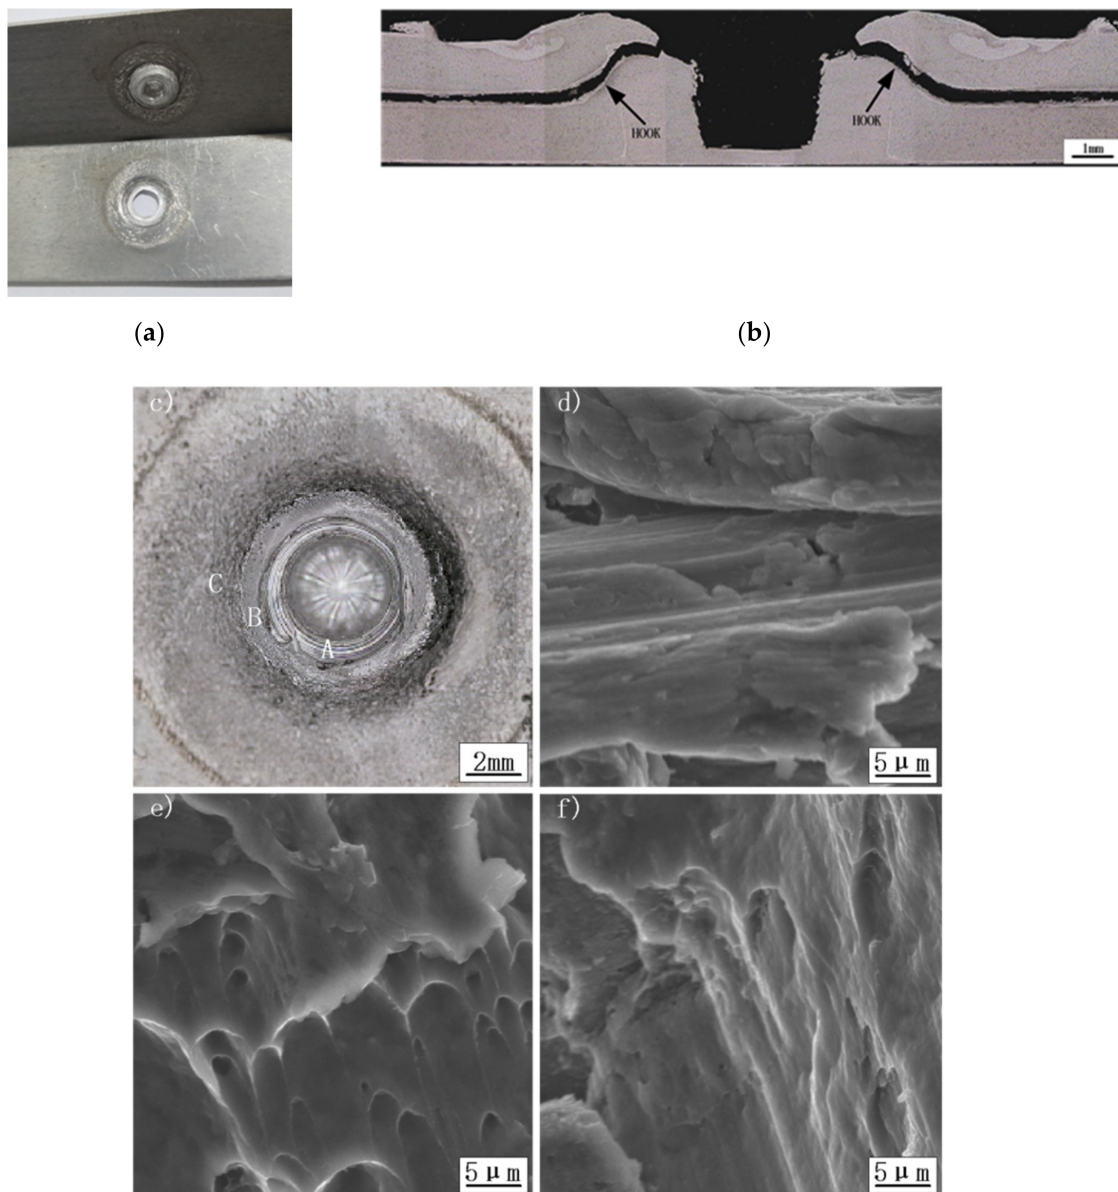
Fracture in unfilled FSSW sample: (a) fractured specimen; (b) cross section of the fractured specimen; (c) SEM images of fracture surface on the bottom sheet; (d), (e), (f) magnified views in the zones A, B, and C in (c), respectively.
